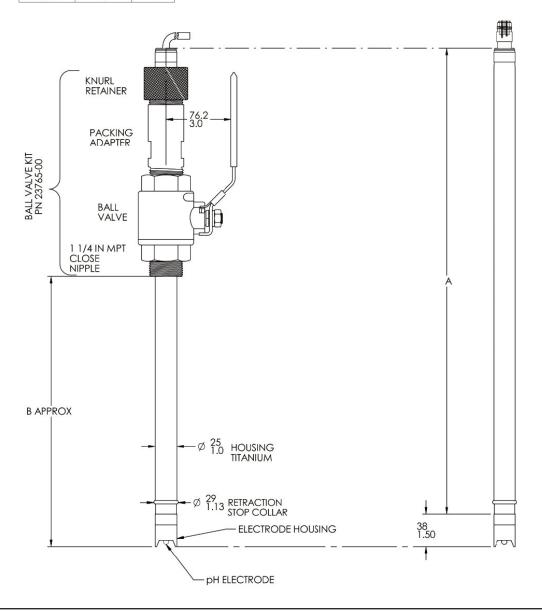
Rosemount 3400HT and 3400HTVP sensor dimensions with optional Ball Valve PN 23240-00
